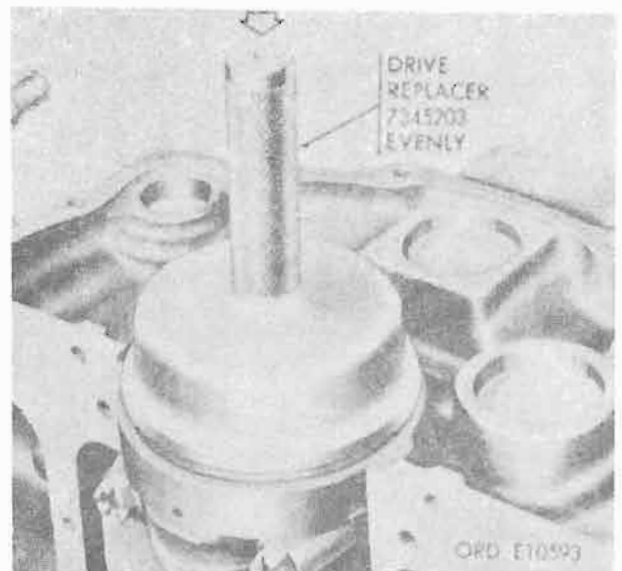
Driving crankshaft rear seal into cylinder block.
